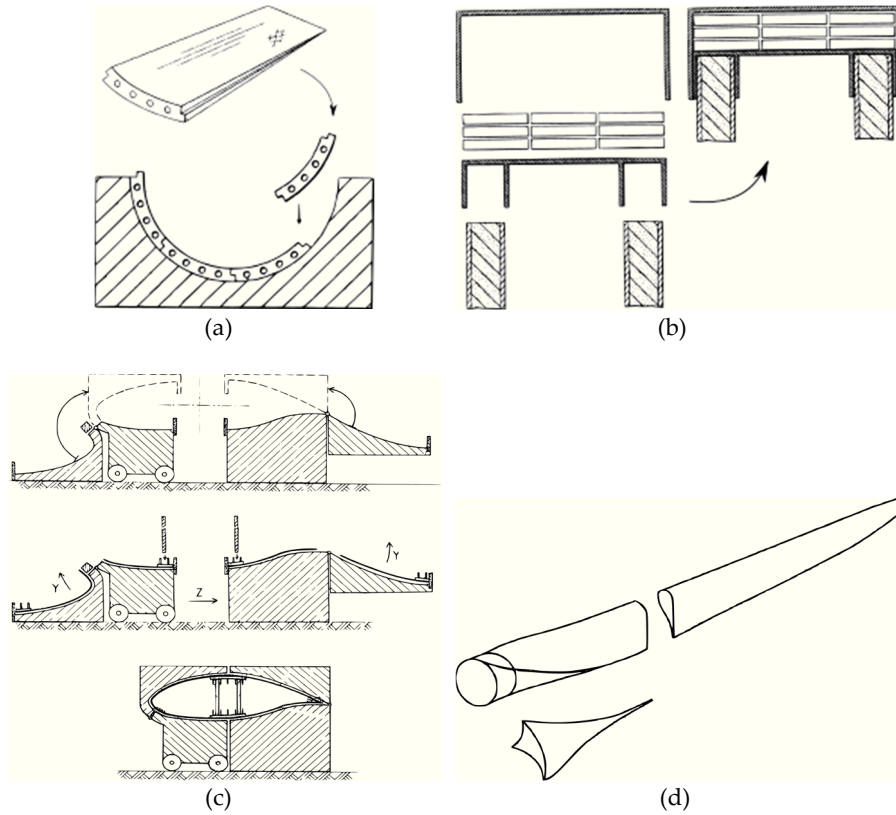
Suggested improvements in the manufacturing process. (a) Blade root joint consisting of pre-fabricated segments as suggested in Ref. [50]. (b) Blade spar structure with a girder assembled from adhesively joining several pultruded planks as suggested in Ref. [56]. (c) Manufacturing method for blades which uses several separated molds, allowing good access to each part as suggested in Ref. [72]. (d) Example of a segmented blade design, suggested in Ref. [73].
